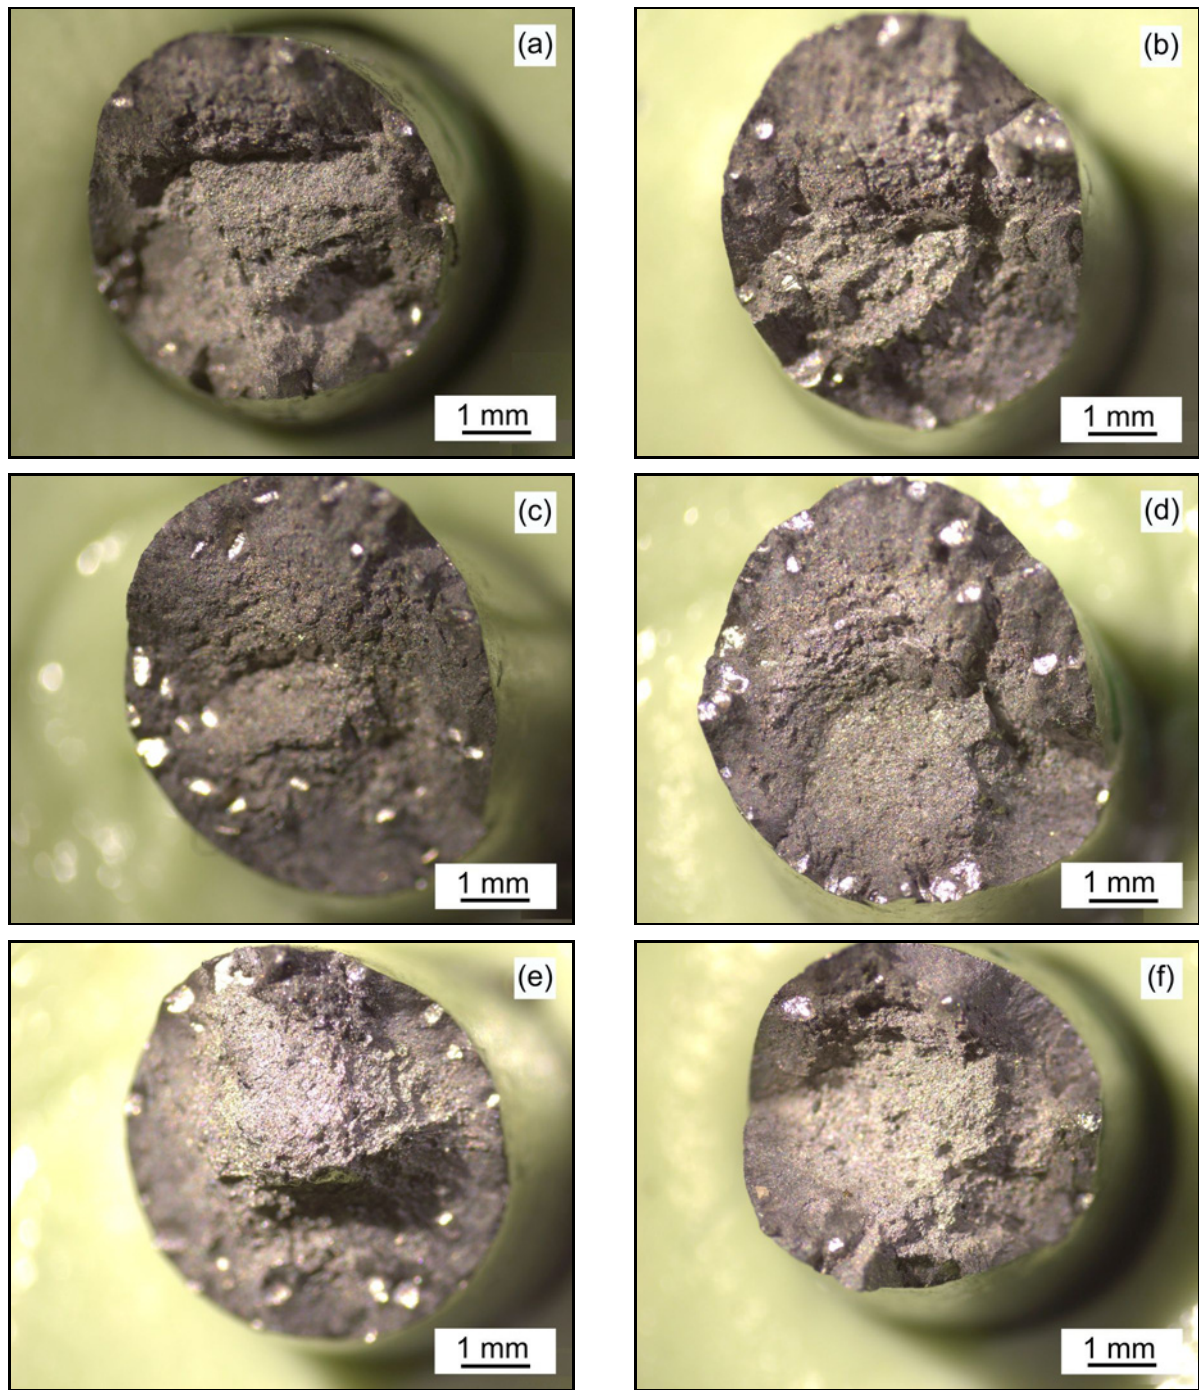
Fracture surfaces of vertically built samples: (a) HT1, (b) HT2, (c) HT3, (d) HT4, (e) HT5, and (f) HT6.
